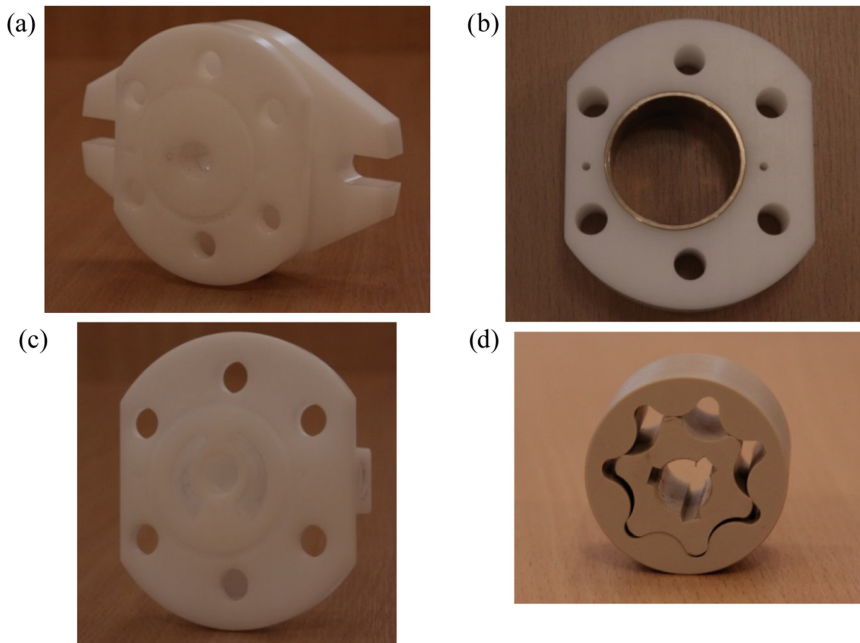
Gerotor pump body parts made of plastics: a) front body; b) middle body with slide bearing; c) back body; d) epicycloidal gear set
